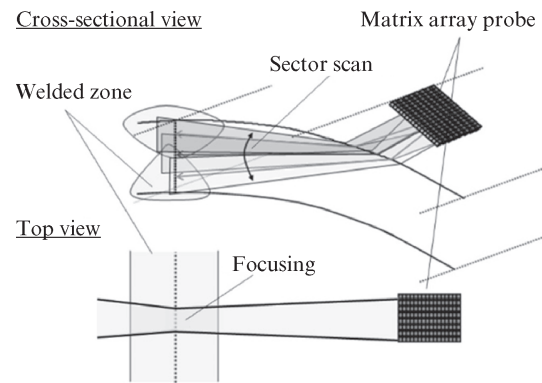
Ultrasonic inspection of weld for UOE pipe using matrix array probe¹⁰⁾
